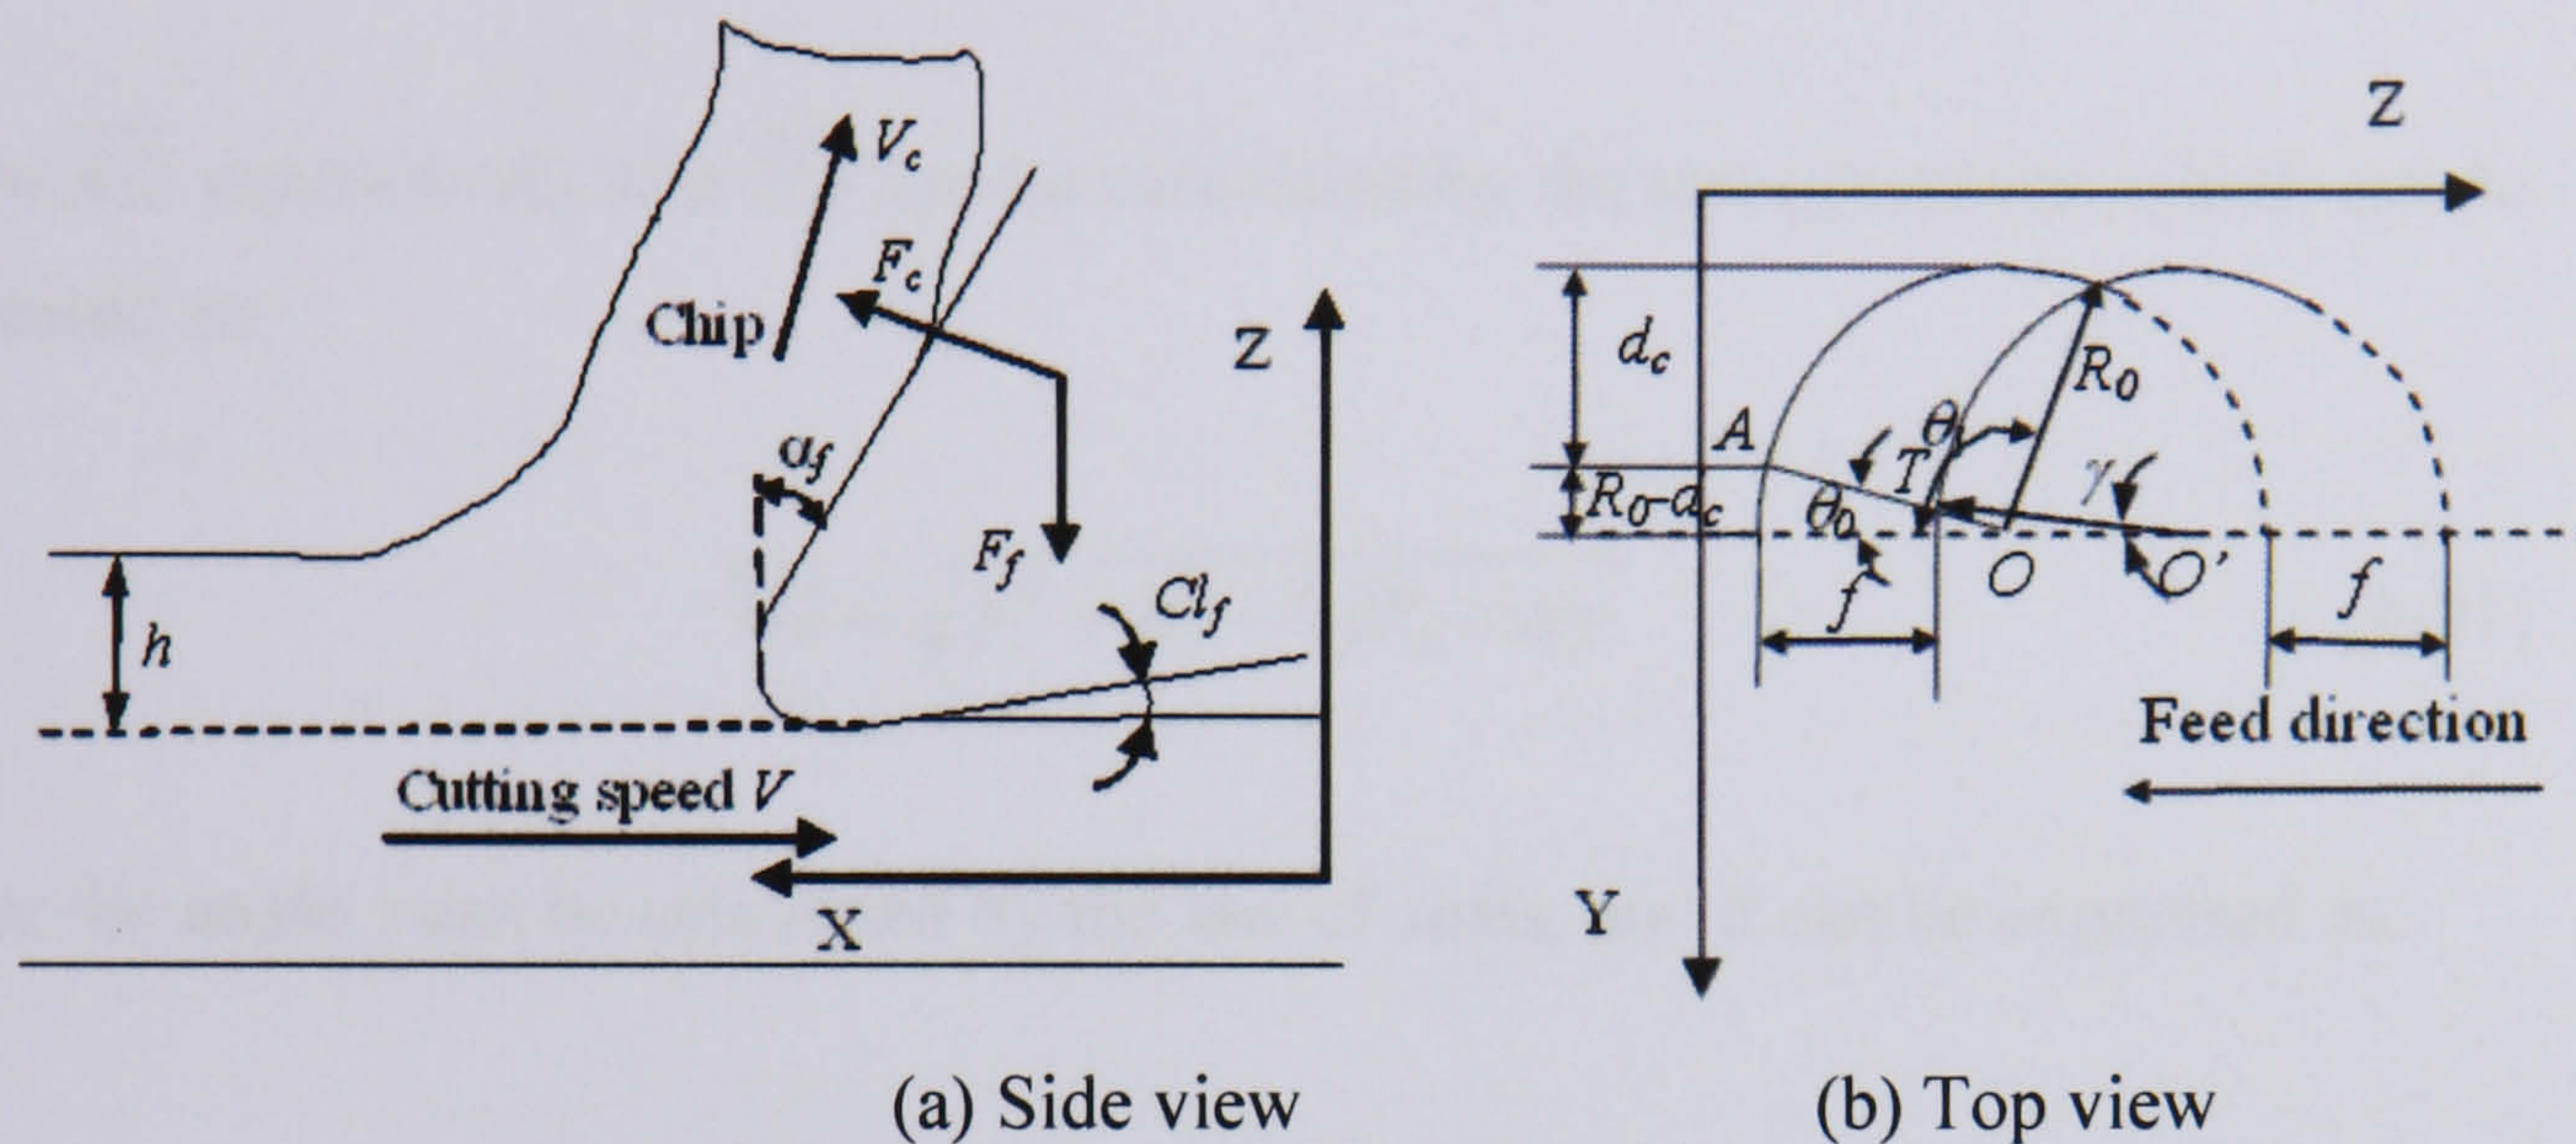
The side view and top view of the tool/workpiece contact area.
